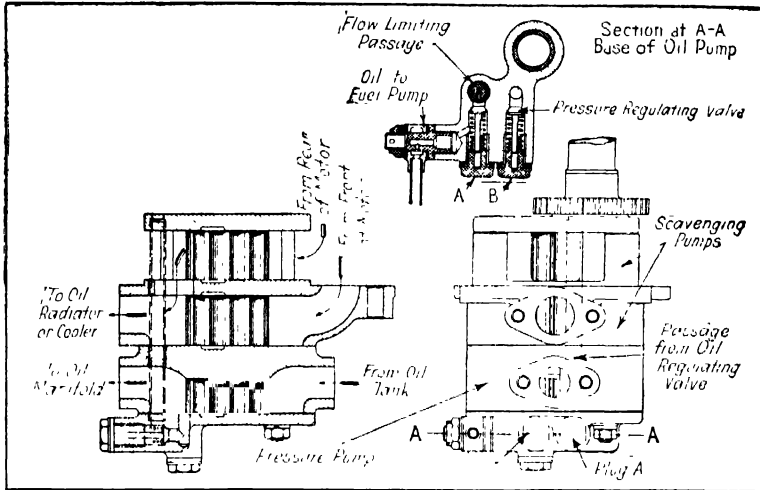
Diagrams Showing Construction of Fiat Triple Section Gear Oil Pump.
